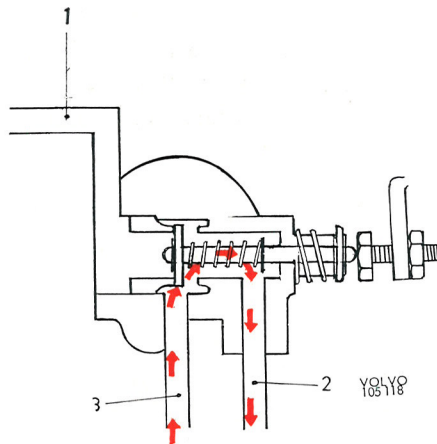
Principle, hot start valve with throttle control in idling position
